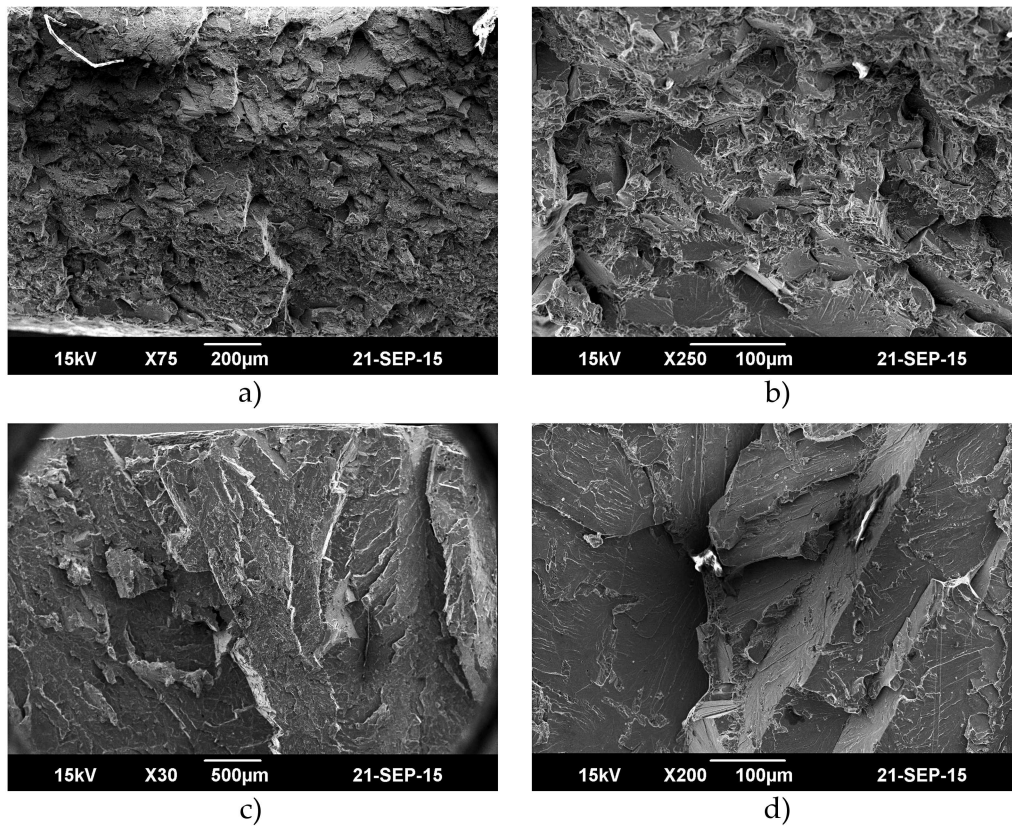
Fractography of failed surfaces: a) and b) on Duplex 4Al arc weld, c) and d) on Duplex 8Al arc weld.
